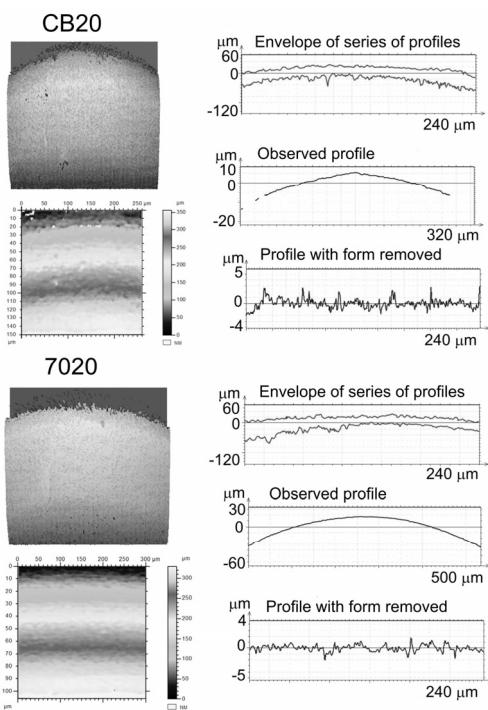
Roughness of cutting edge for a) CB20 and for b) 7020 tool material
